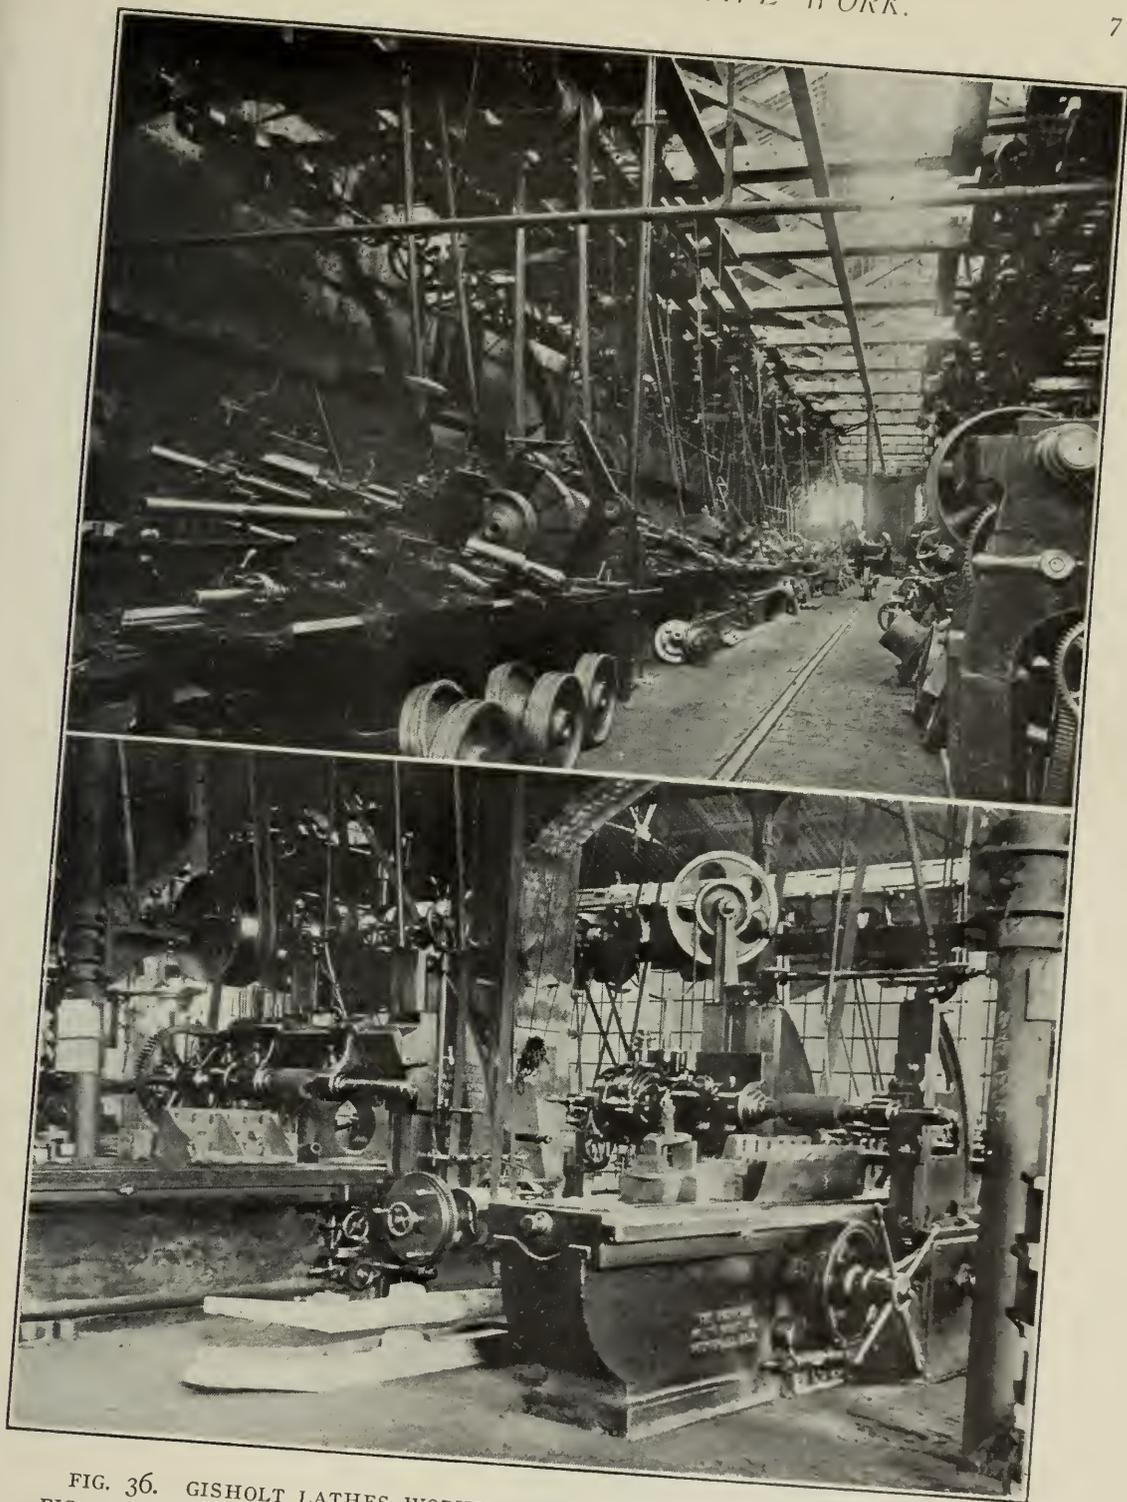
GISHOLT LATHES WORKING ON PISTONS AND CYLINDER COVERS.
